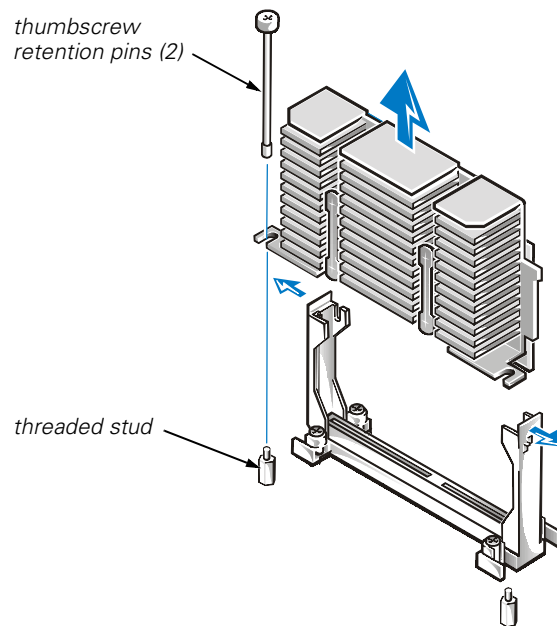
Removing an SEC Cartridge and Heat Sink
